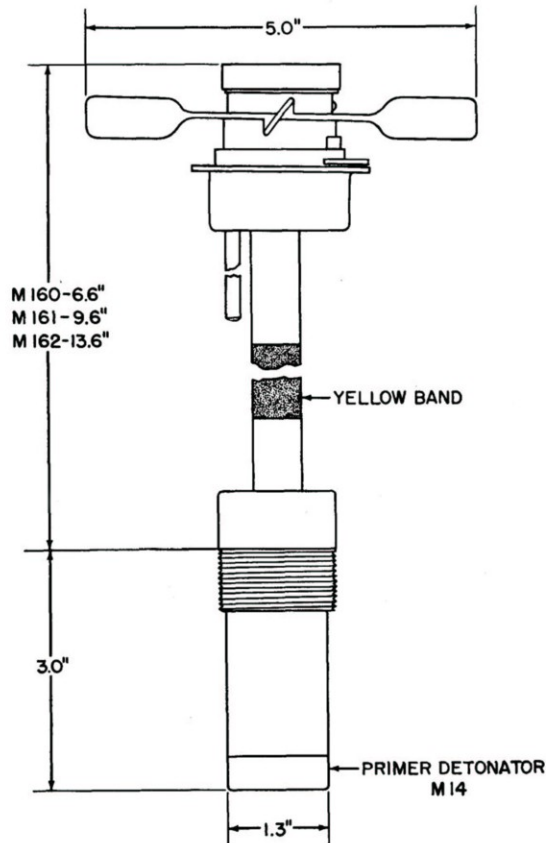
Outline Drawing of Tail Fuzes M160, M161, M162
